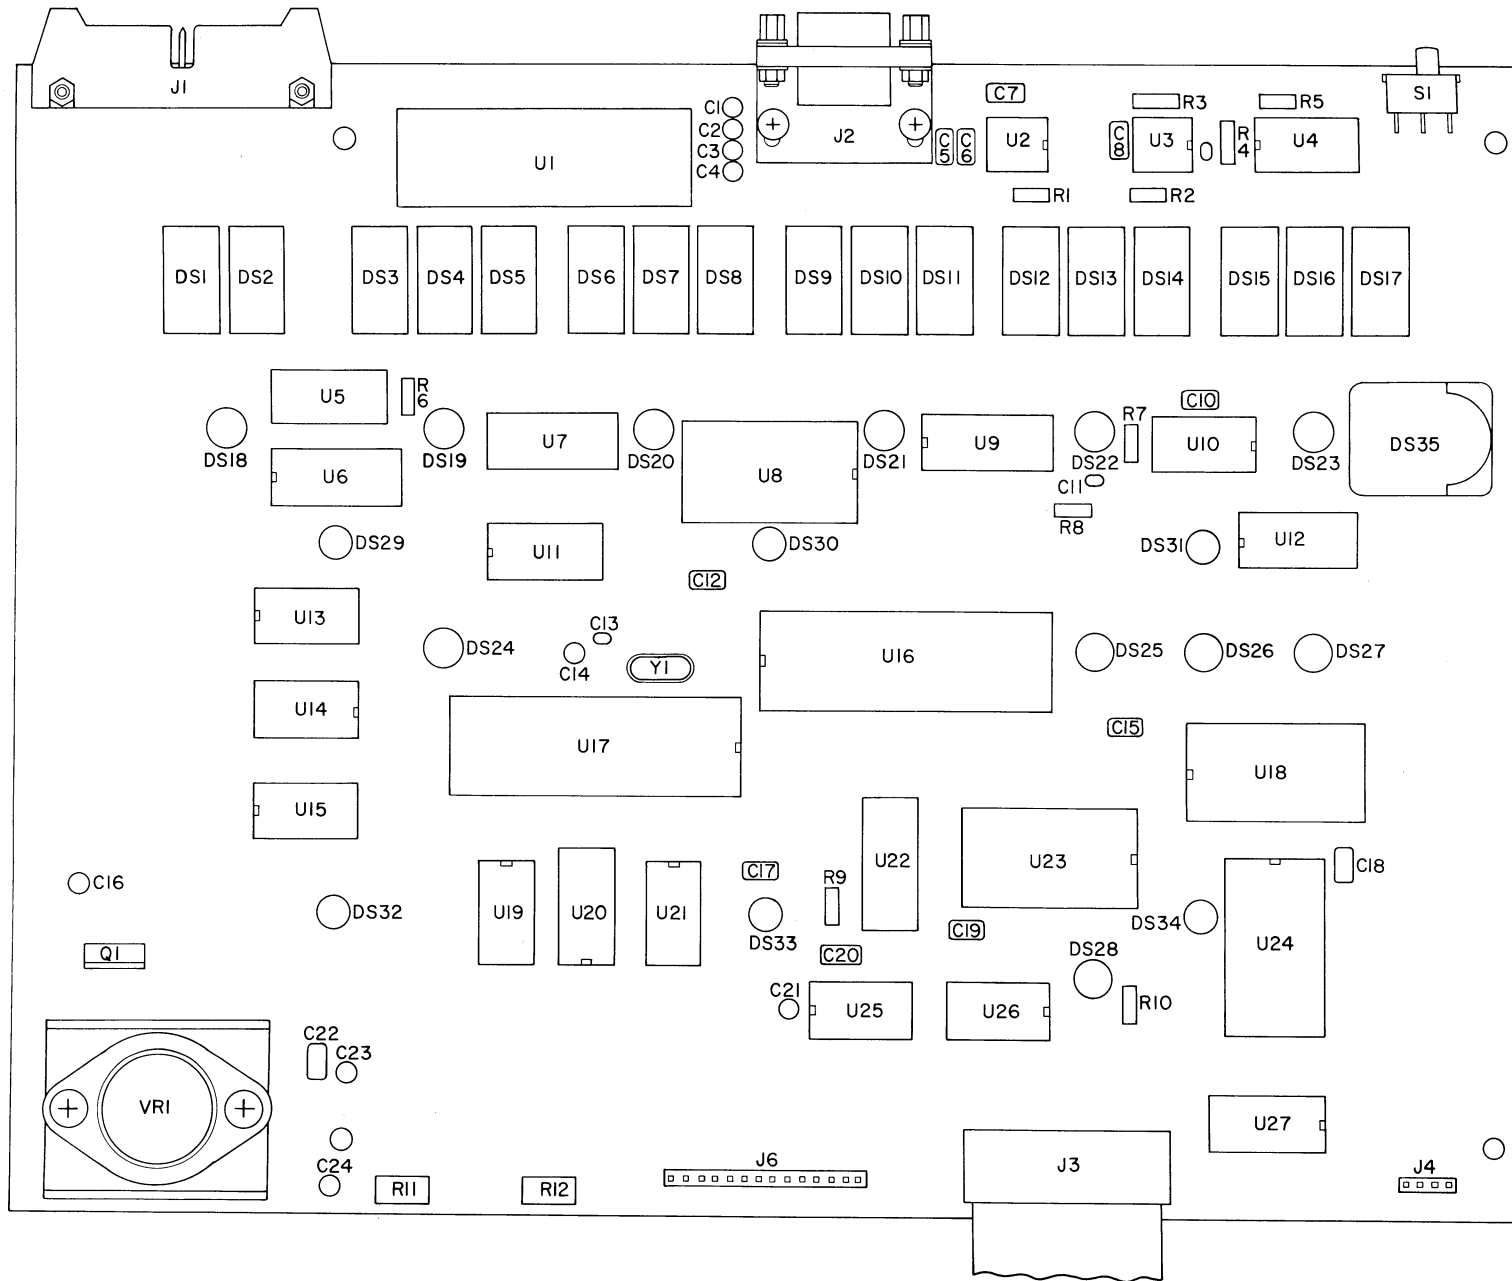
CLS Translator/Controller Circuit Board, Component Location
